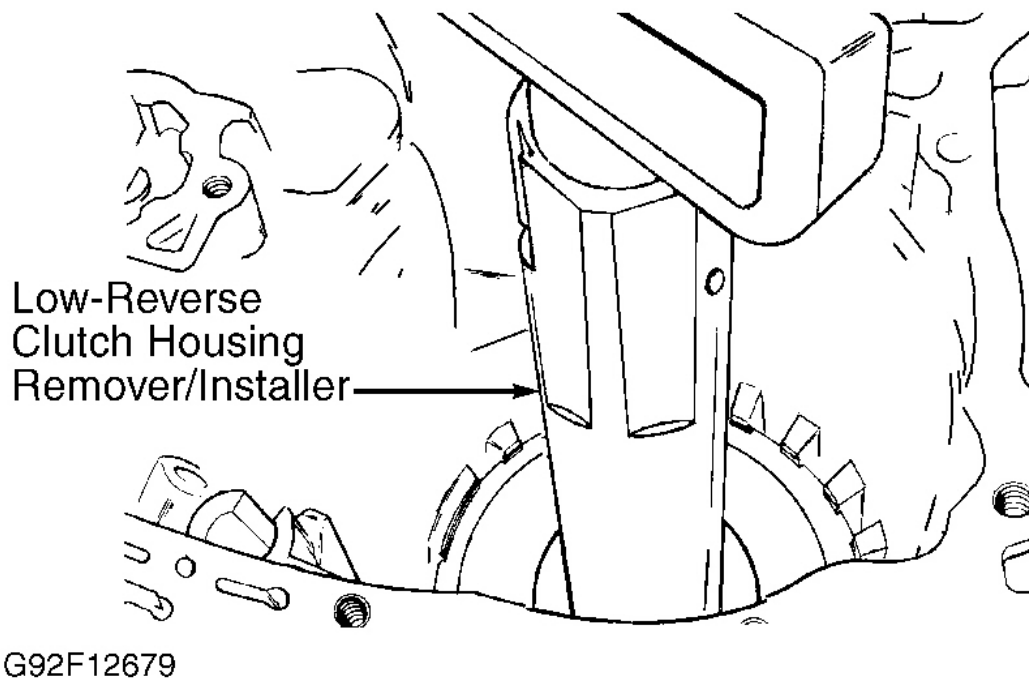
Removing & Installing Low-Reverse Clutch Housing
